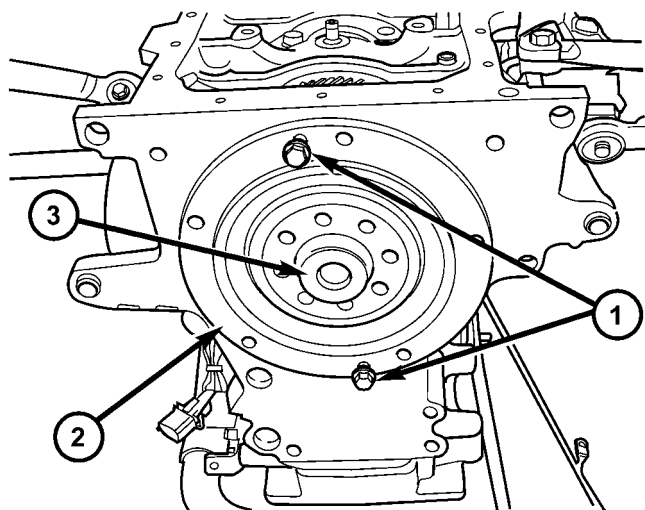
2.5L REAR MAIN BEARING SUPPORT
